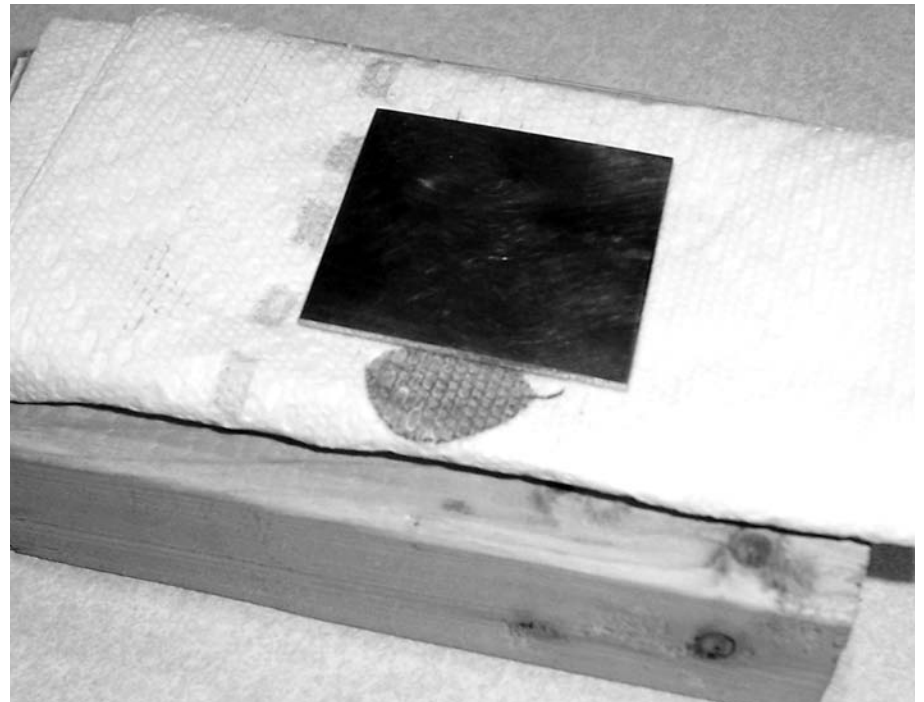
This stack includes the 2 × 4, paper towel and clean copper clad circuit board material.
